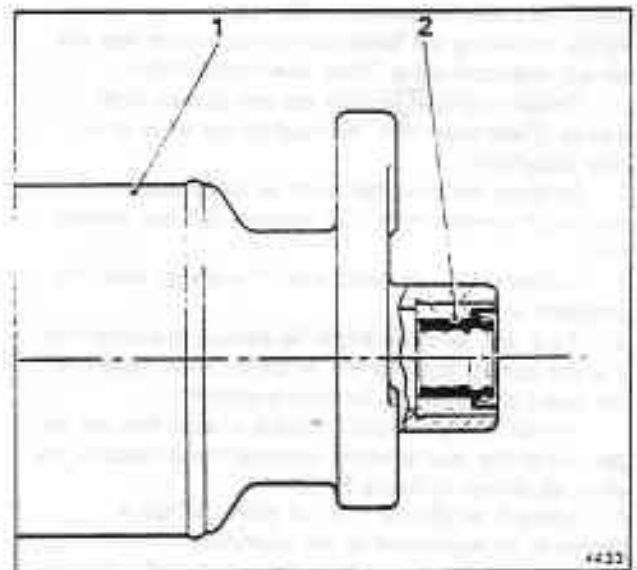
Propeller shaft, centring bush/lip seal assembly (Flexible coupling)
